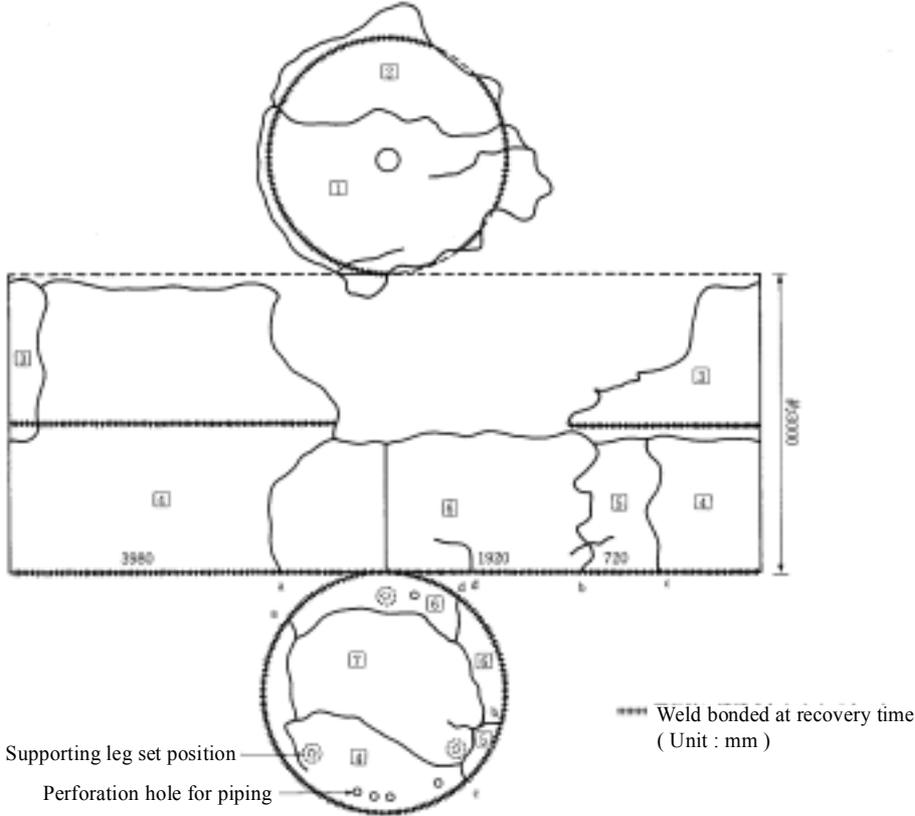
Exploded circumstances of outer vessel (Carbon steel).
